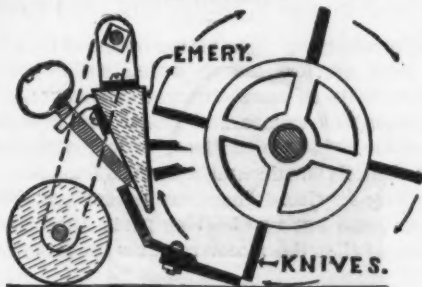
End View of Pike's Lawn Mower Sharpener in Position and Demonstration of Grinding Process.
